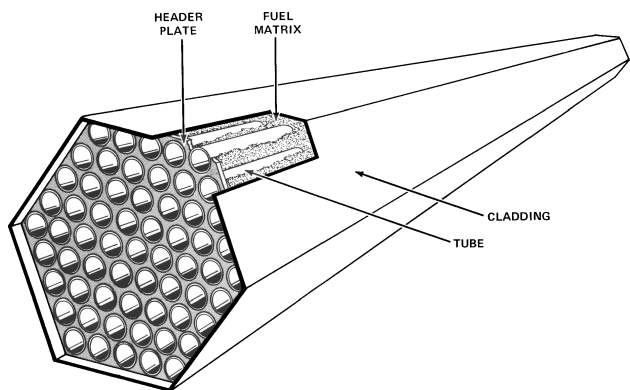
Typical cermet fuel segment: wrapper, coolant flow tubes, and cermet matrix made of refractory metal and fissile bearing ceramic.
